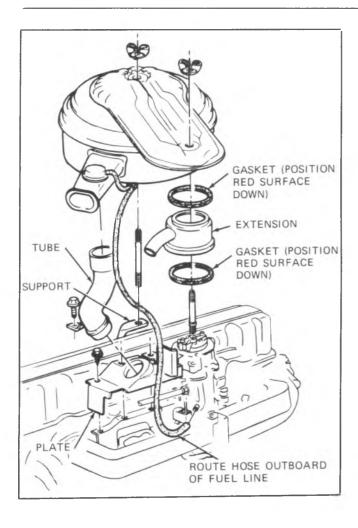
E-27--Air Cleaner-L6-Integrated Head
